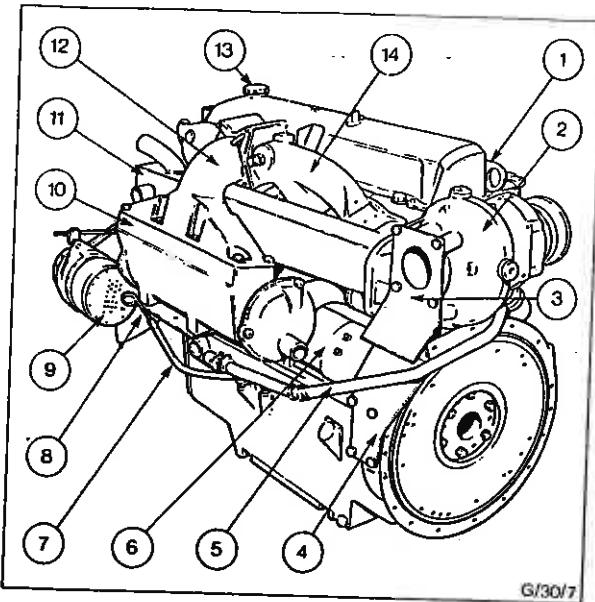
6 Cylinder Intercooled Marine Engine
